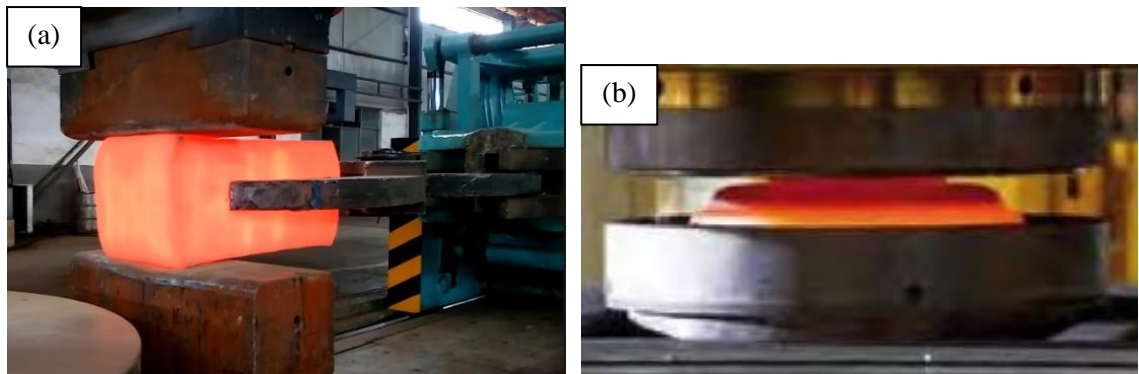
(a) Open die forging and (b) Closed die forging.
